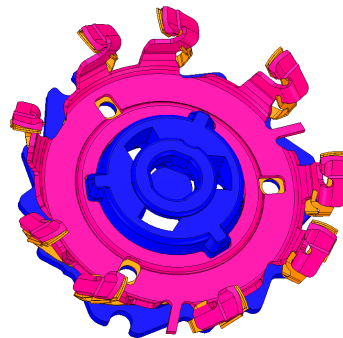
Blades in pink with bearing plate and coupling spindle in blue color
